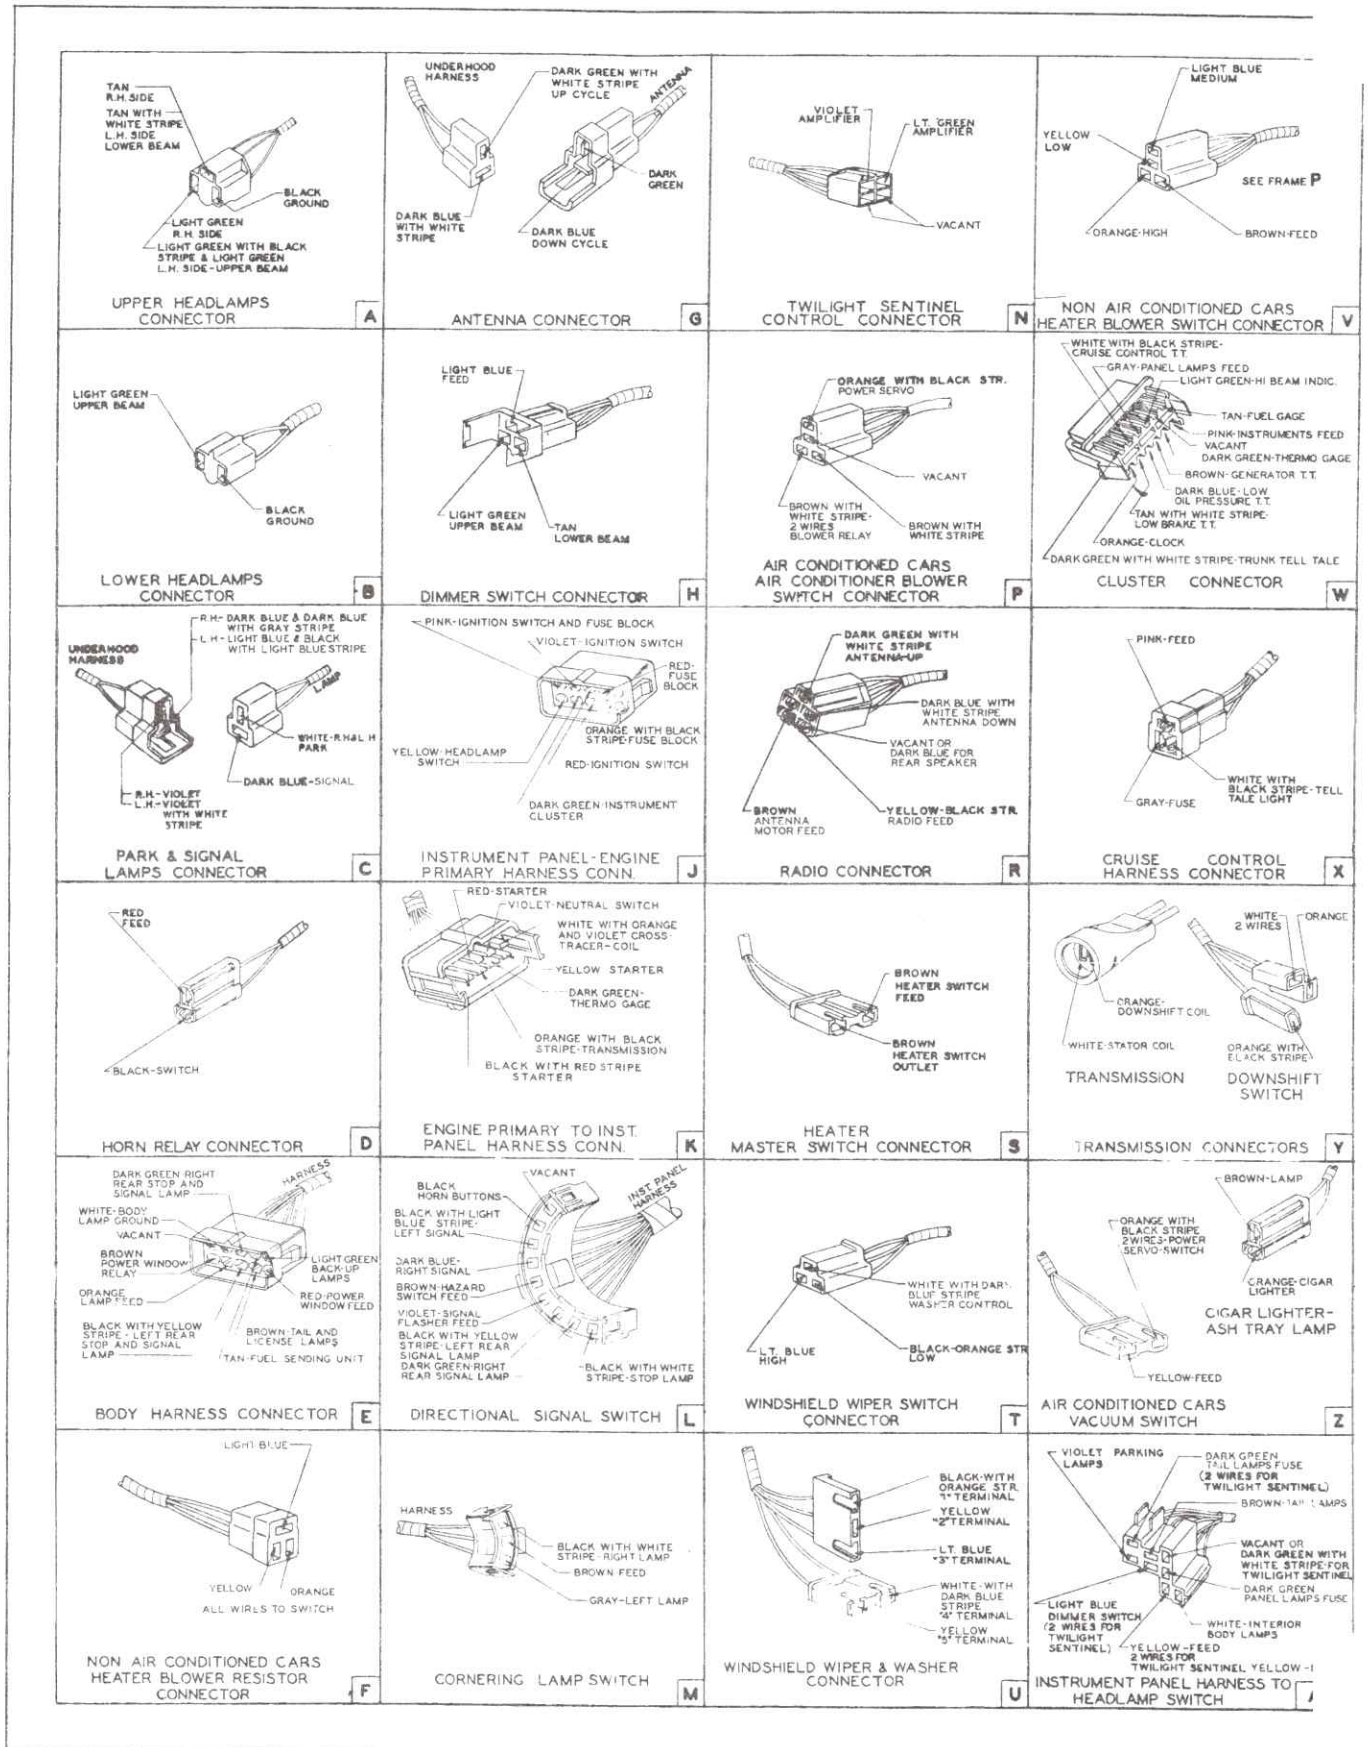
Chassis Wiring Connectors - 680, 681, 682, 683, 697 Styles
